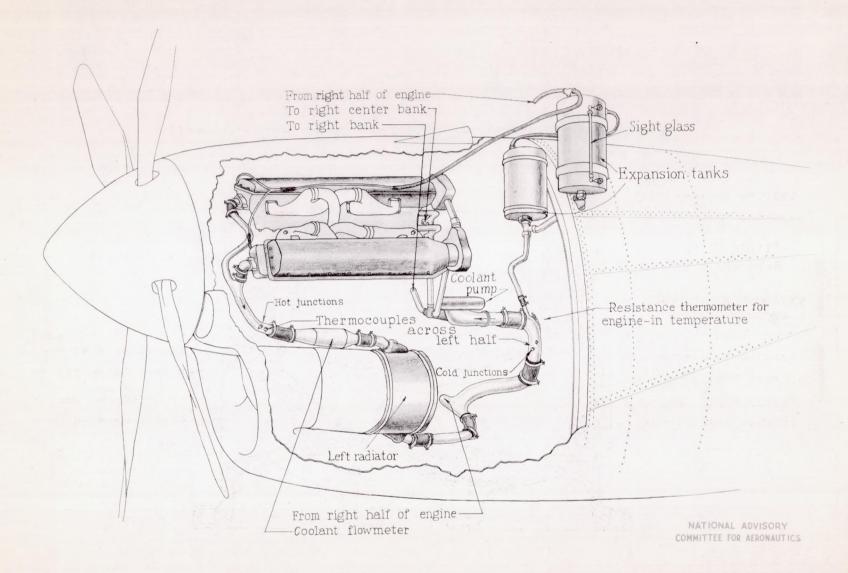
Location of coolant flowmeter and thermocouples for left half of engine.
